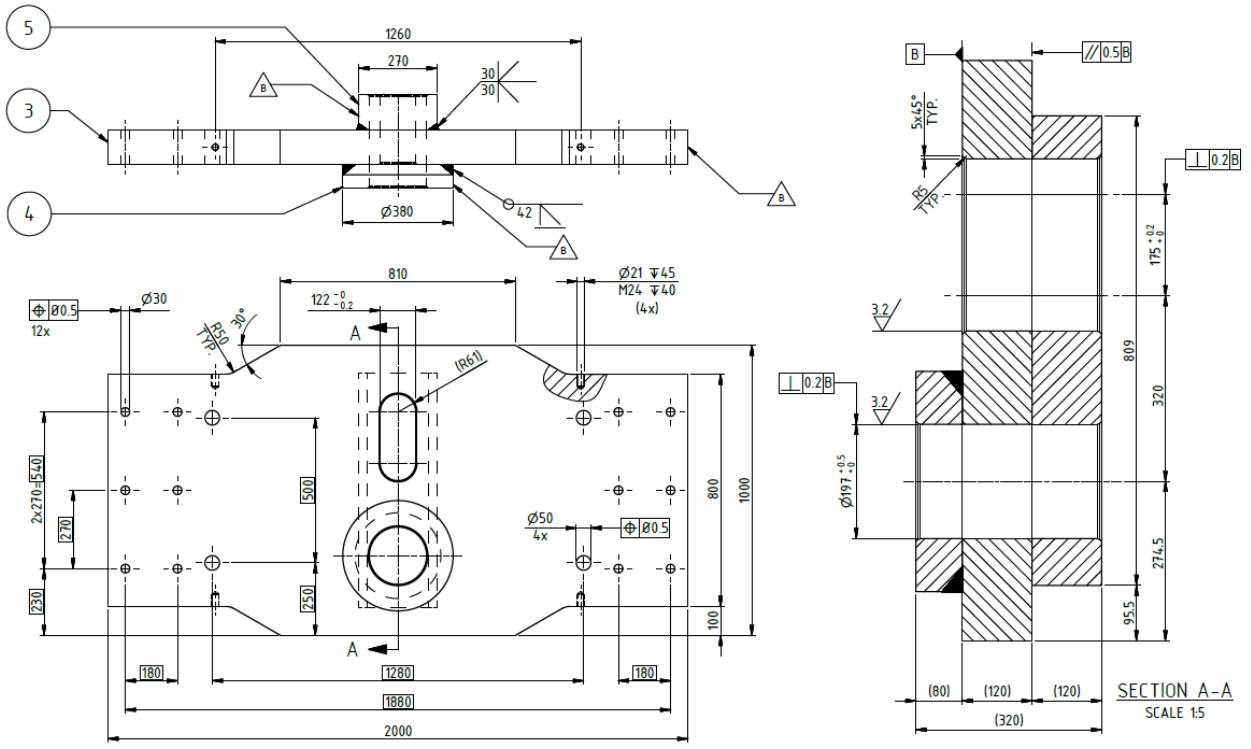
Custom plate and custom cheek plate #1 & #2 assembly.
